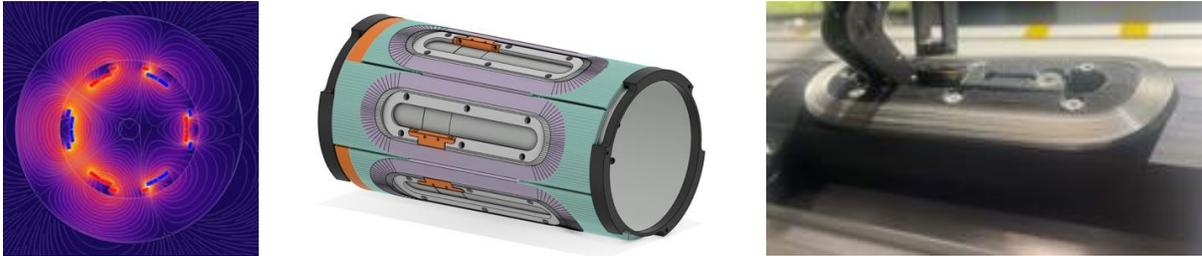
Left: cross-section of a nested sextupole, quadrupole, and dipole magnet for the FCC-ee short straight sections. Middle: technical design of a sextupole subscale demonstrator. The final magnet module will be 1 m in length. Right: winding tests for HTS sextupole coils with 4-mm ReBCO tape.
